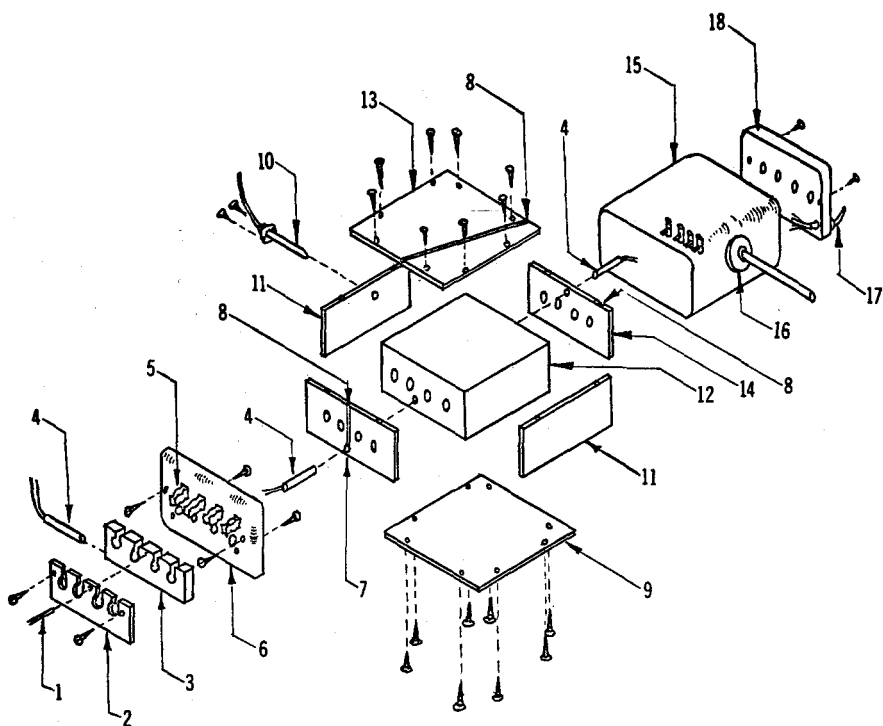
EXPLODED VIEW OF THE MODIFIED KONTES
